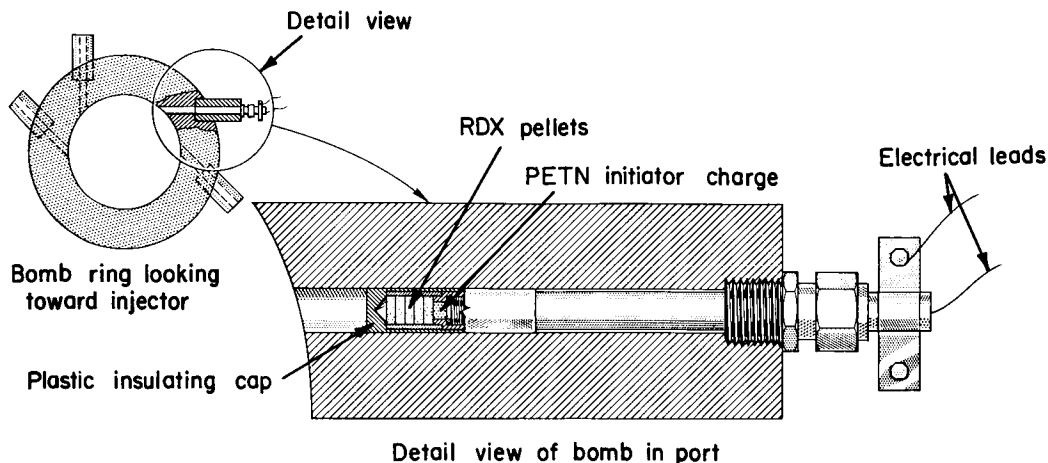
Bomb ring and explosive bomb details.
